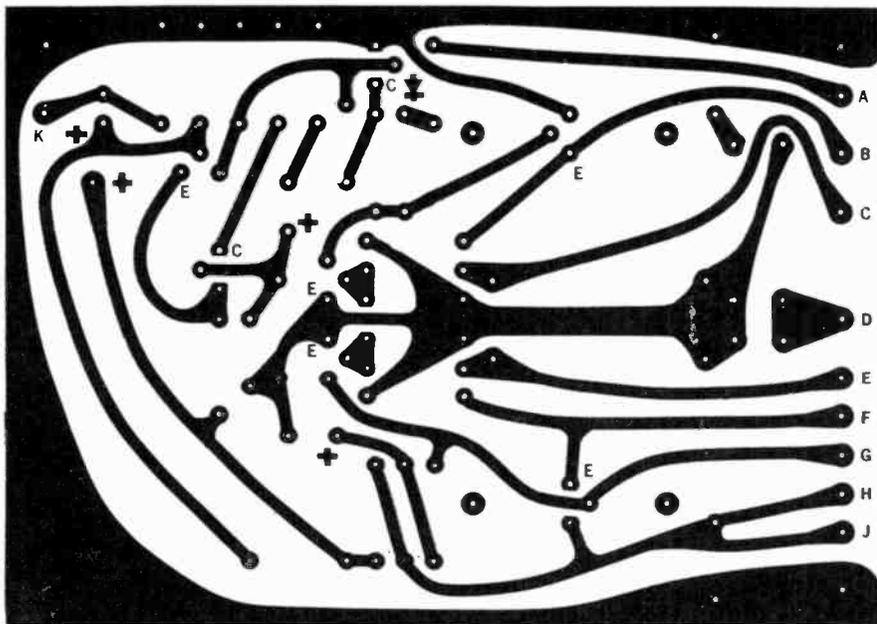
Foil pattern for the Super Tiger. Like the Tiger PC board, this one is also available etched and drilled (see Parts List for Fig. 5).
